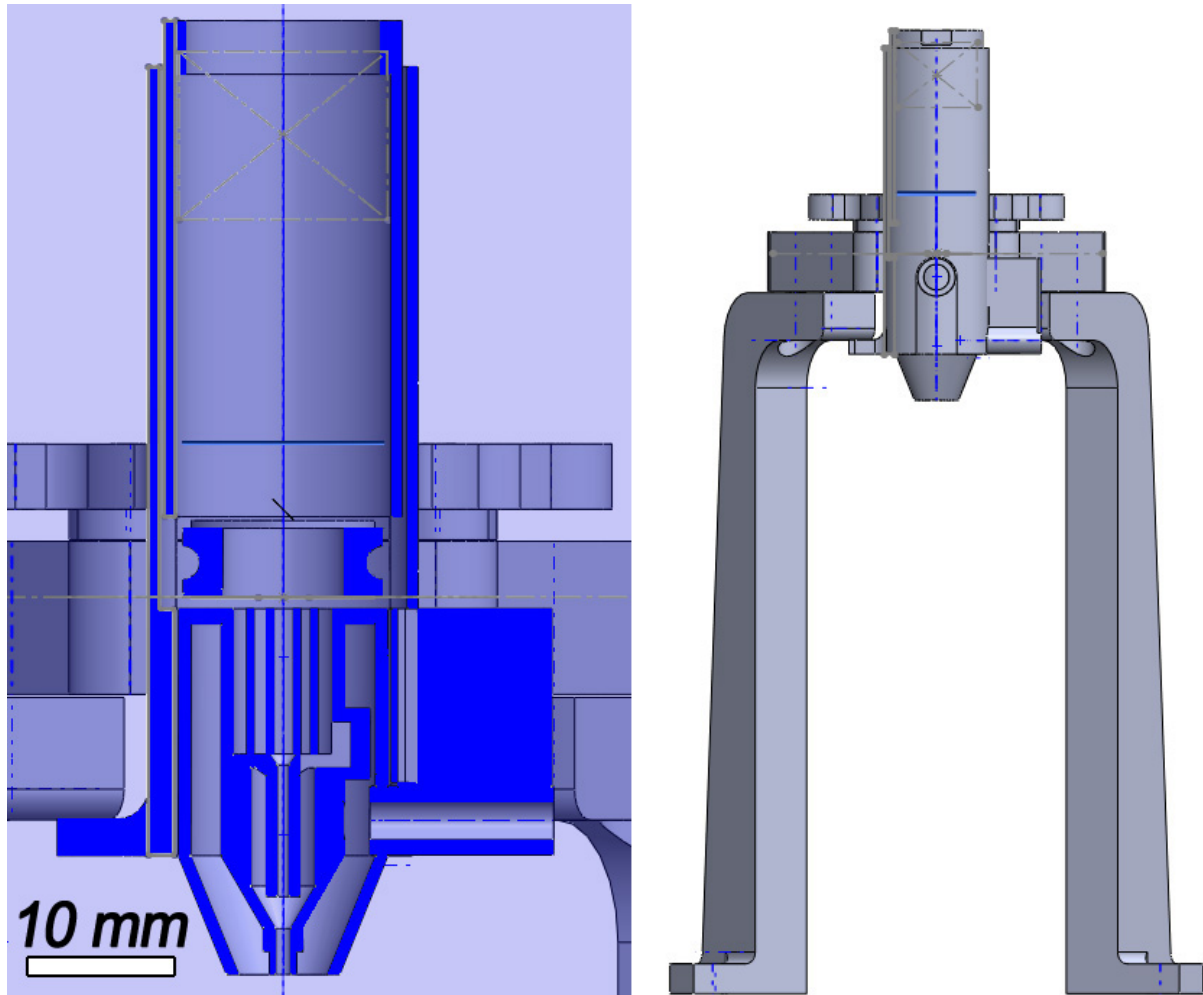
Cross section view of Nozzle 3 CAD model.
